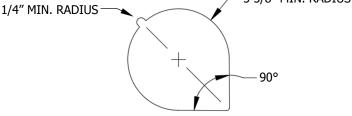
METER PANEL COVER CUTOUT DETAIL
